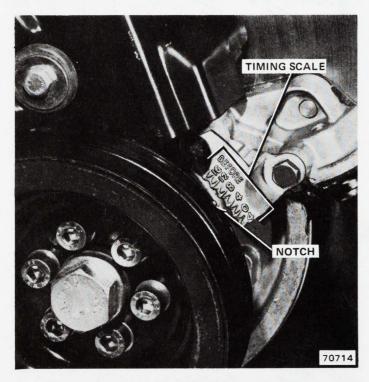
A-7 Timing Mark Location—Four-Cylinder Engine
